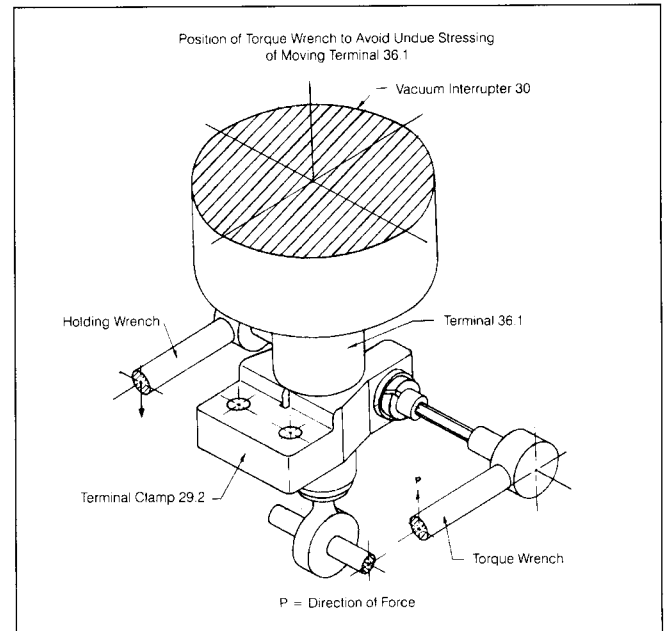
Illustration Showing Required Technique for Fastening Terminal Clamp Hardware
